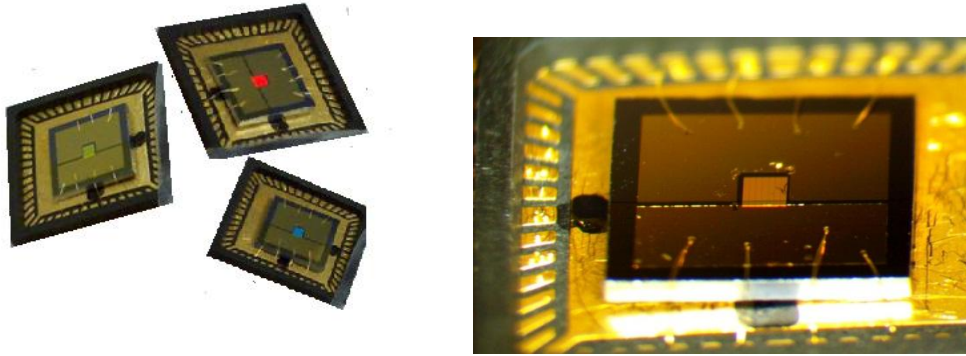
Metamaterials mounted in the chip holder and wire-bonded to the outside contacts.
